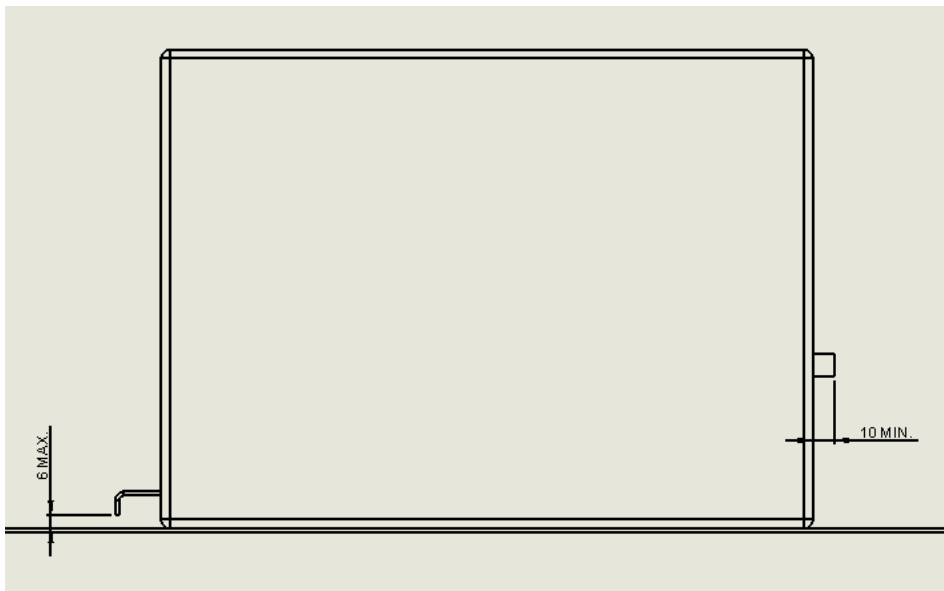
Rear datum pointer and front plunger – protrusion reference geometries
